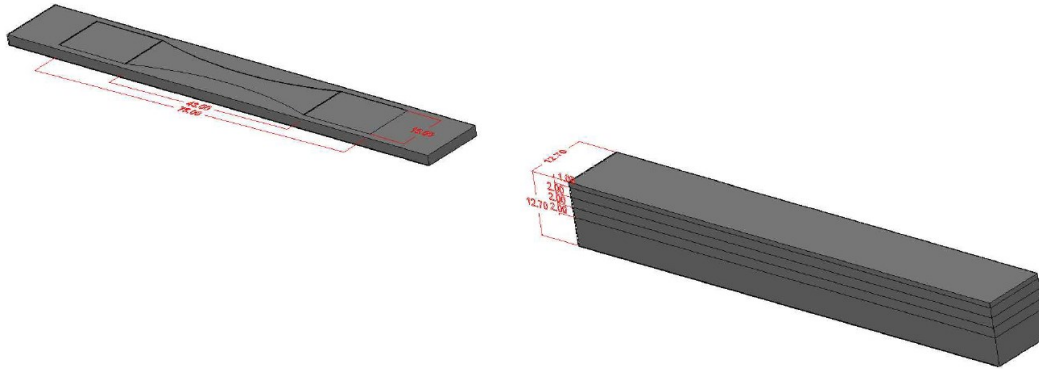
Illustration of the extraction of the tensile testing specimen.
